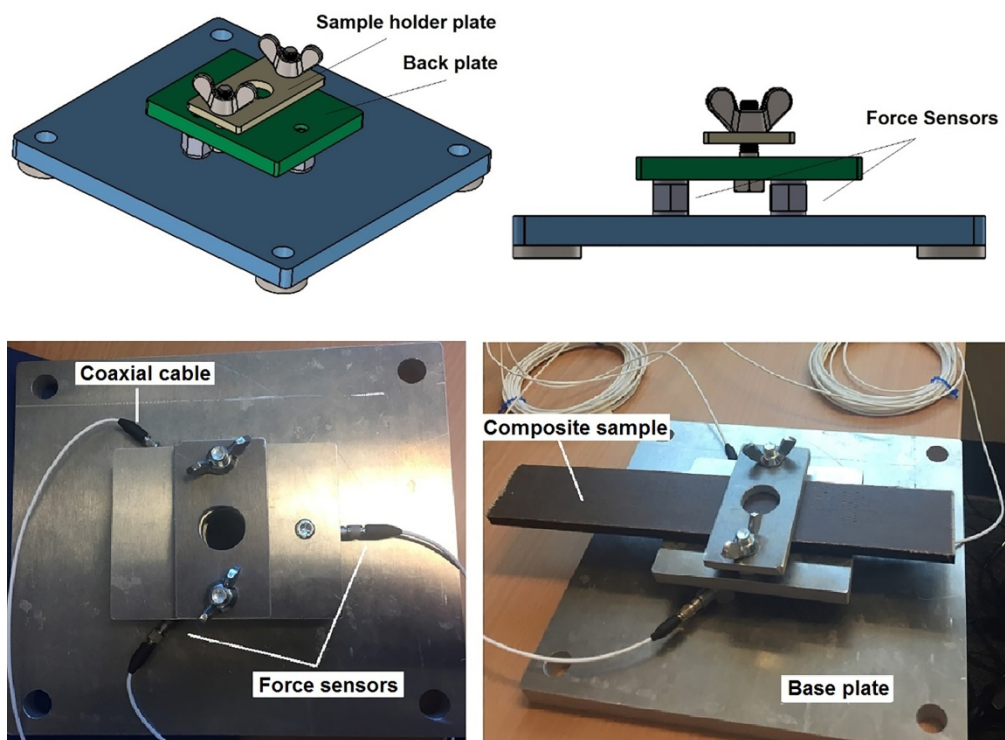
Drilling sample holder and set-up for measurements the thrust force
